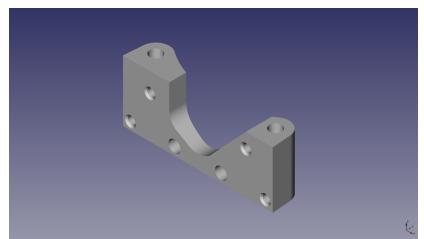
Begonia 3D Printed Y Rod Mount Render
